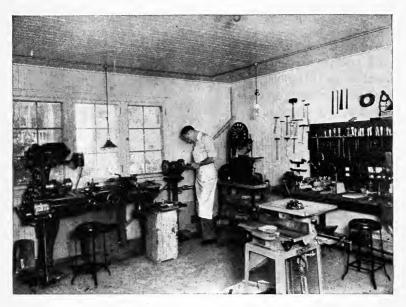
A typical home shop containing a metal working lathe. Many interesting and constructive models may be built in such a shop
